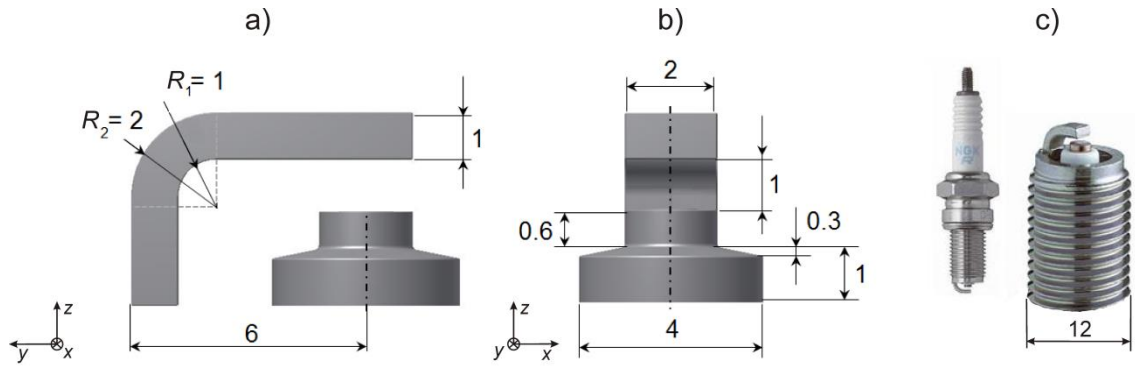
Geometry of the considered standard type of spark plug – marked dimensions are expressed in mm; figure a)  $y$ - $z$  view, figure b)  $x$ - $z$  view, figure c) NGK (DR8ES) standard type of the spark plug with 12 mm of shell diameter.
